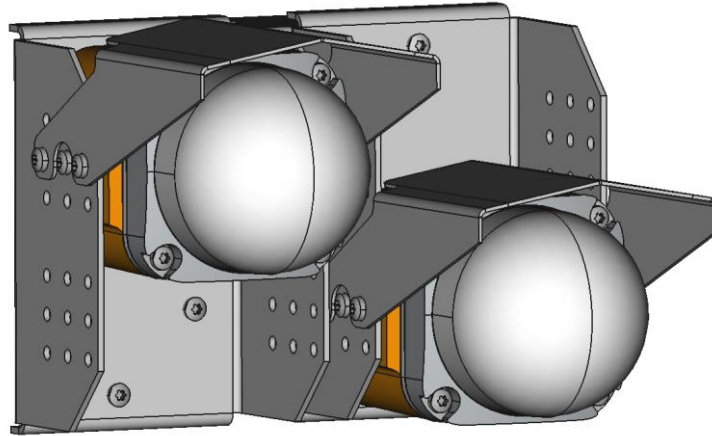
Two LPR®-1DHP-291 mounted in the diversity mounting bracket
